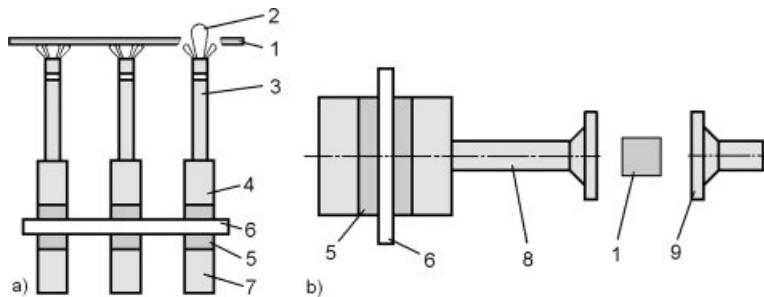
Air cushion holding of small parts using acoustic waves
